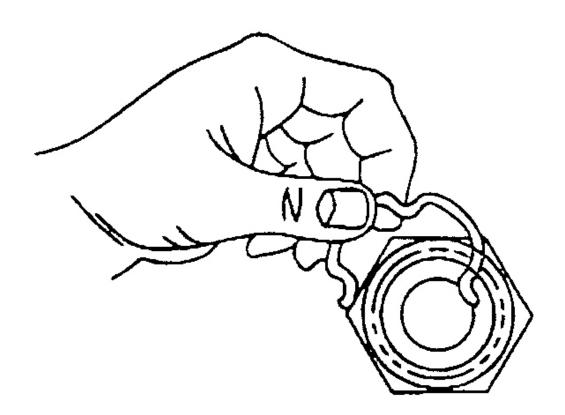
Hooking Retaining Ring Into Quick Connect Fitting Courtesy of GENERAL MOTORS CORP.
